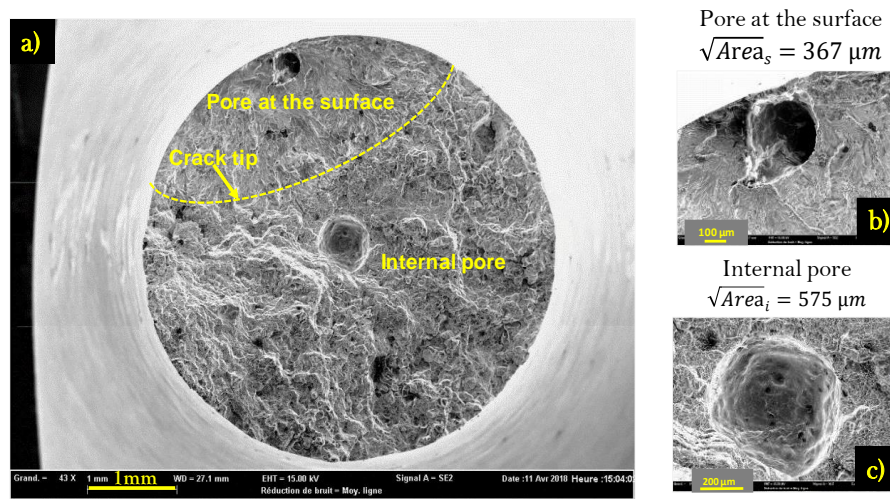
Fatigue failure surface for a specimen taken from cast aluminum alloy (AlSi7Mg03 - T7), which has failed at $S_a = 55$ MPa and $N_f = 919402$ cycles for a stress ratio $R = 0.1$. (a) Macroscopic view, detailed view of (b) surface pore and (c) internal pore. It shows the importance of the position of a defect relative to the free surface, in terms of fatigue failure (El Khoukhi et al. 2019)
